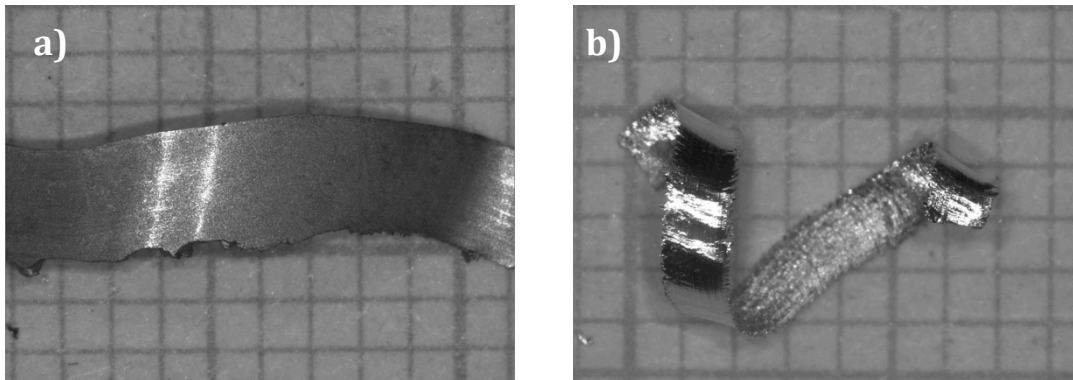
The feed stock material geometry after final cutting: a) aluminium and, b) magnesium. Pictures acquired with a millimeter grid paper background.
